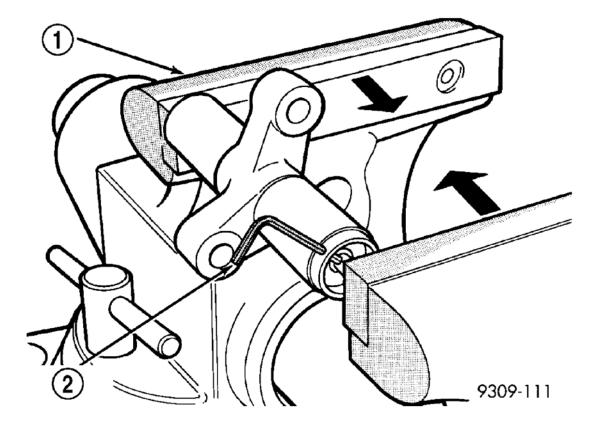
Compressing Timing Belt Tensioner Courtesy of CHRYSLER LLC
